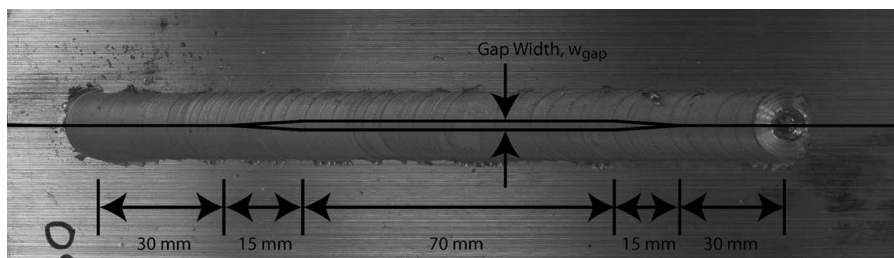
Photo of weld with 2.00 mm wide gap overlaid
